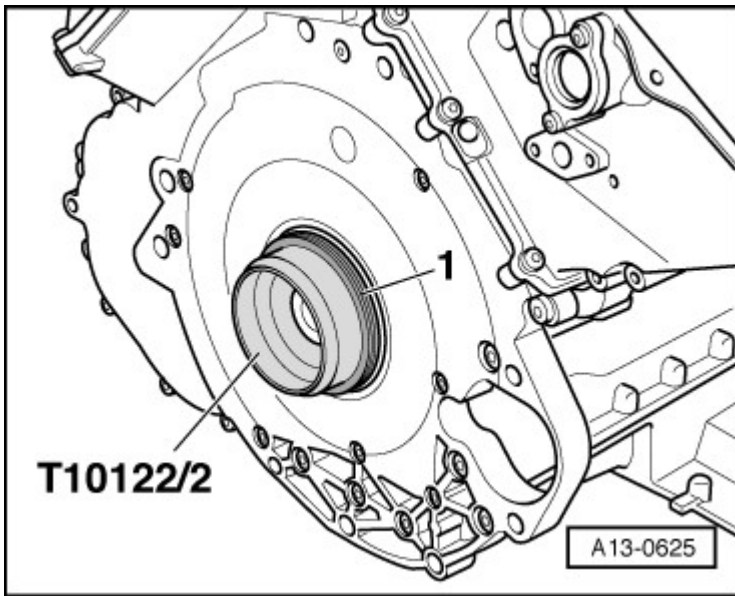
Identifying Pull Sleeve T10122/2 With Sealing Ring On Crankshaft
